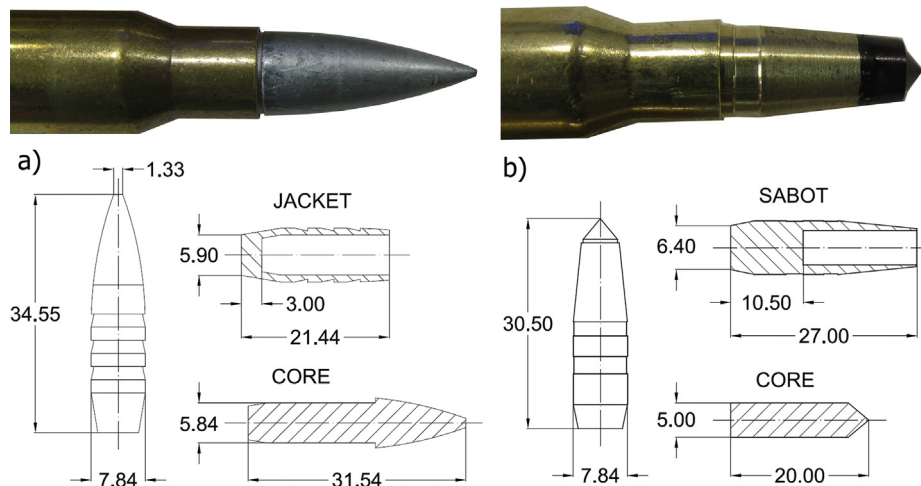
Armour piercing ammunition with principal dimensions: a) steel core, b) tungsten carbide core.
